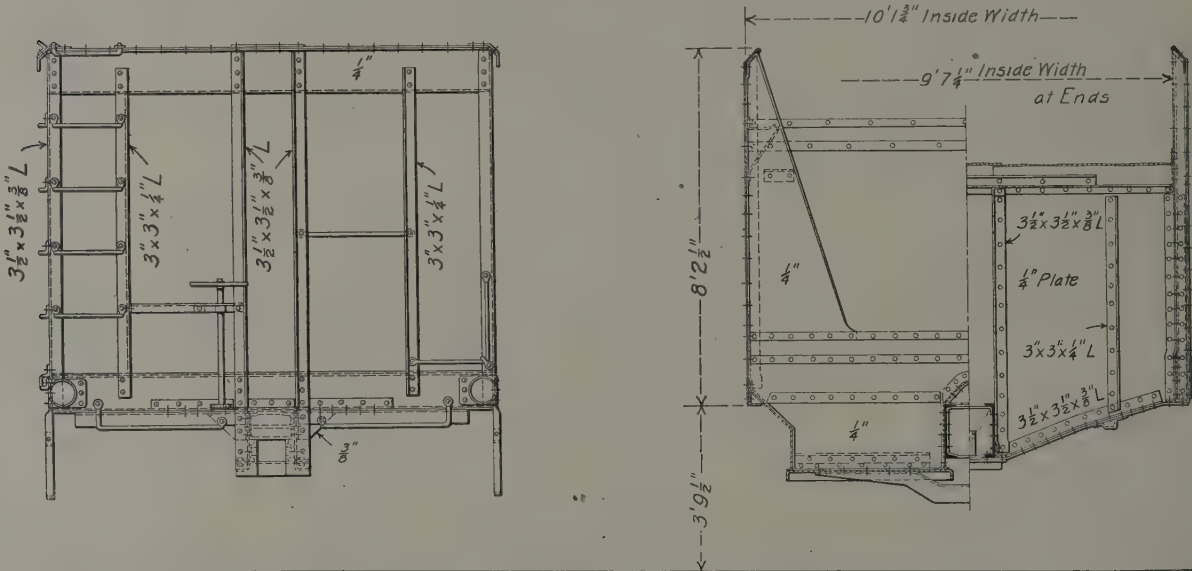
End Elevation and Cross Sections, 100-Ton Hopper Car Shown in Figs. 51 and 54.
